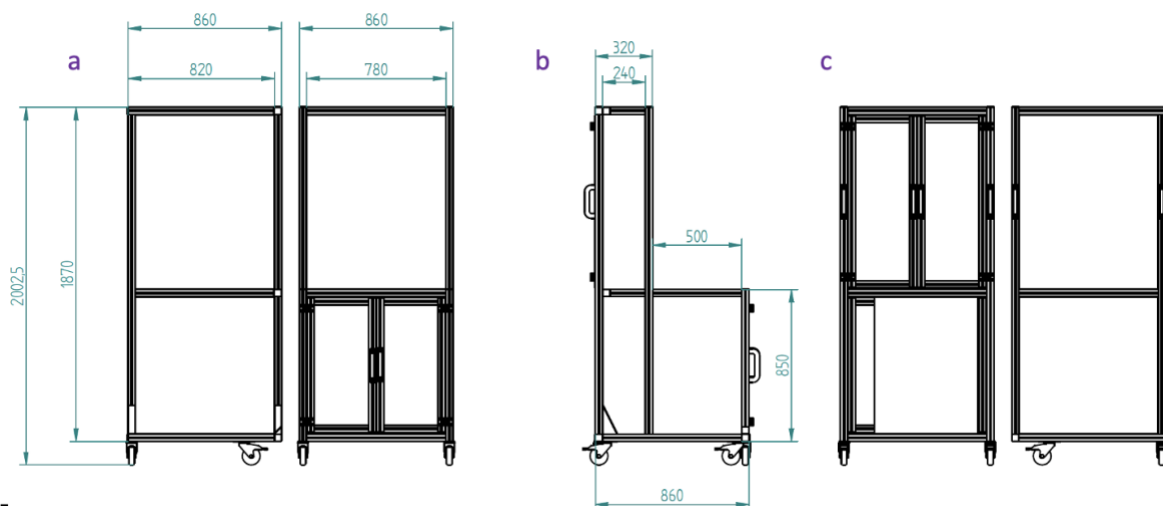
a) Front view of test rack with dimensions; b) Side view of test rack with dimensions; c) Back of view of the rack[48]
